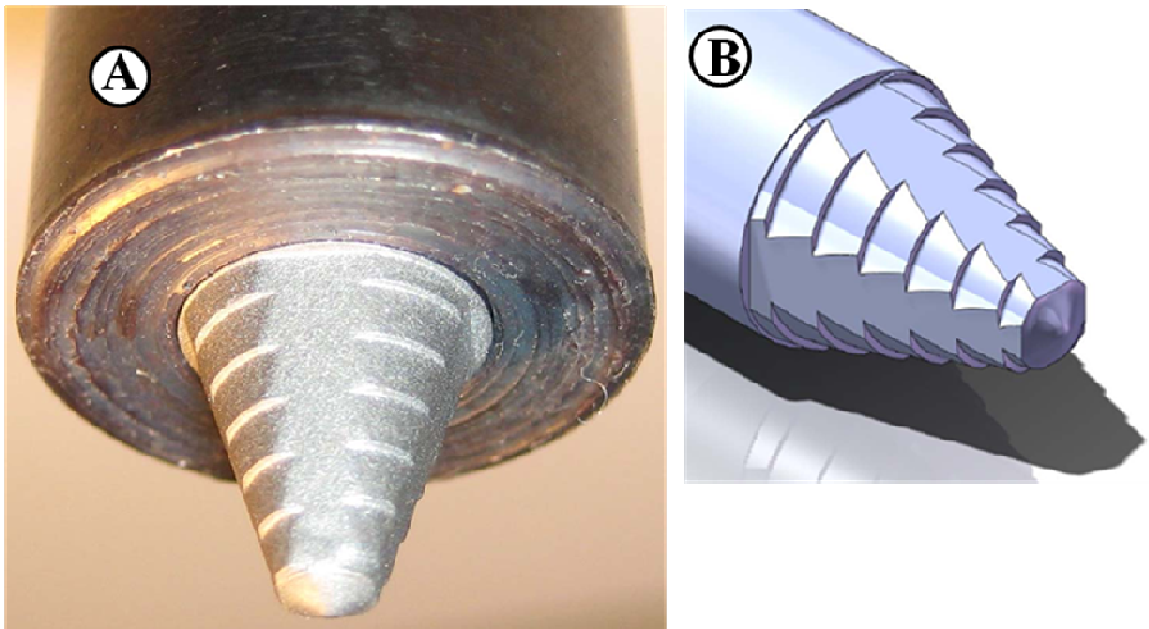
(A) Image of partially scrolled H13 tool. (B) Schematic of partially scrolled H13 tool.
